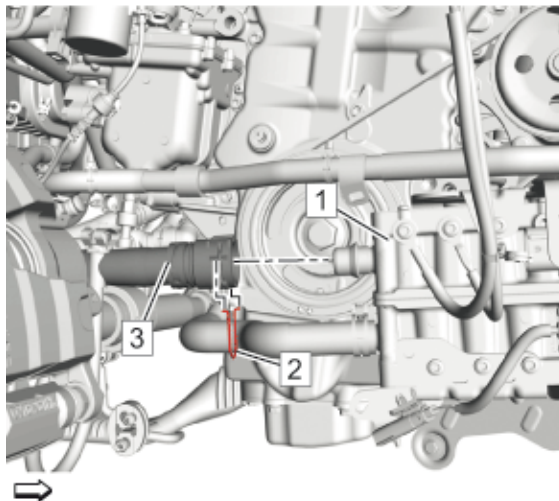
Heater Coolant Heater, Heater Inlet Hose And Quick Connect
